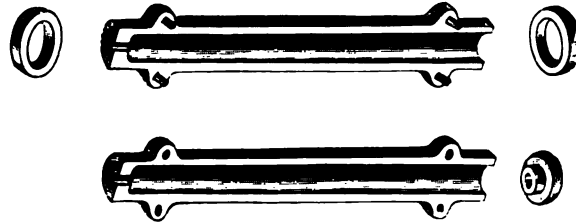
Bronze Mould for making Plaster Rollers (Chavassieux).
